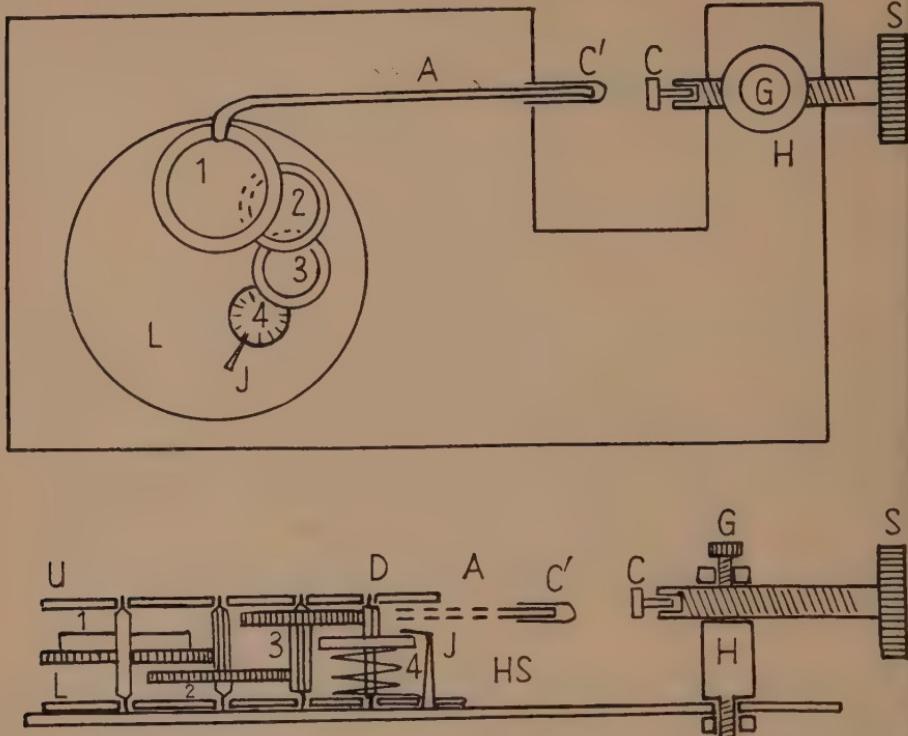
Leaf thickness change meter in plan and section. A, brass arm; D, dial; H, holder; J, indicator; S, setting screw; C and C', glass contacts; G, grub screw; HS, hairspring; L, lower assembly plate; U, upper assembly plate; 1-4, gear wheels.
